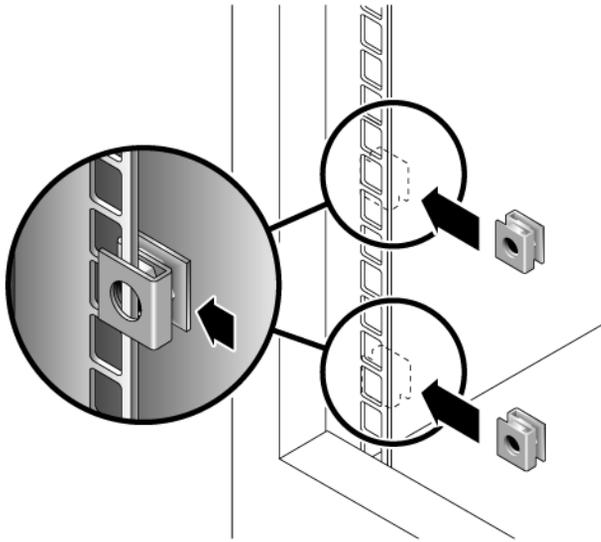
Inserting Cage Nuts Over Rail Mounting Holes in Cabinet Rails
